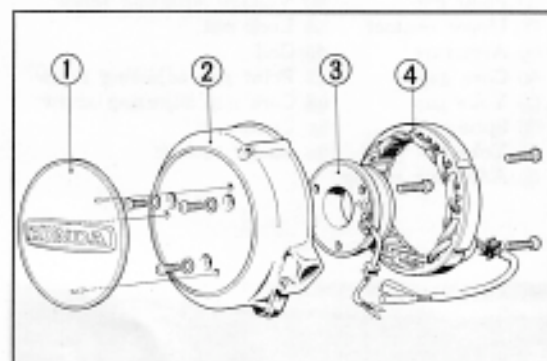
① Side cover ② Generator cover ③ Field coil ④ Stator coil
